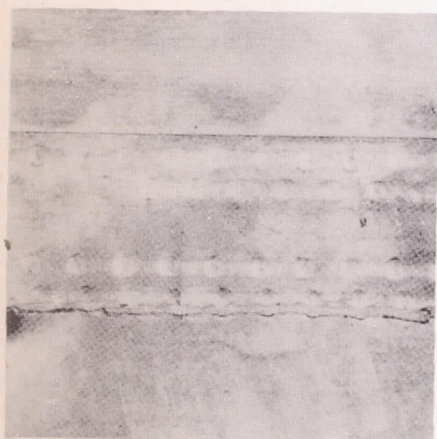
Lap joint specimens with three rows of spot welds
